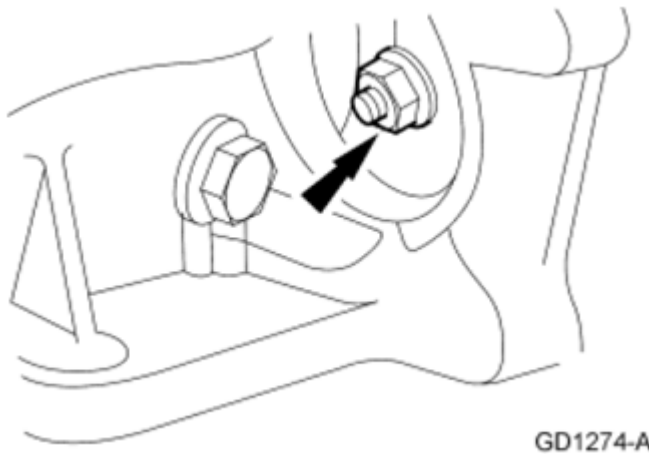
Locating Torque Converter-To-Flexplate Nuts
